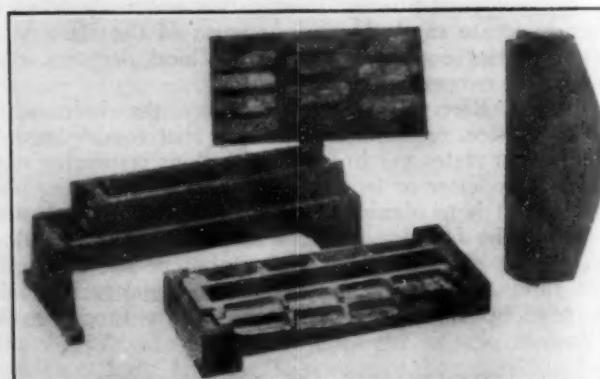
ASSEMBLED MOLD BOX, SCREEN AND RAMMER BLOCK FOR BOND TEST
